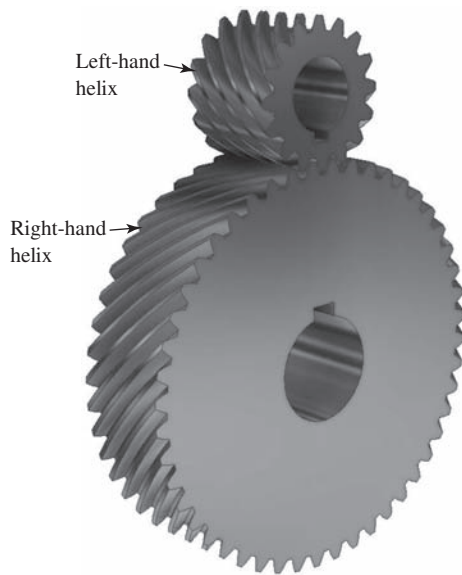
Helical gears in mesh. These gears have a 45° helix angle
